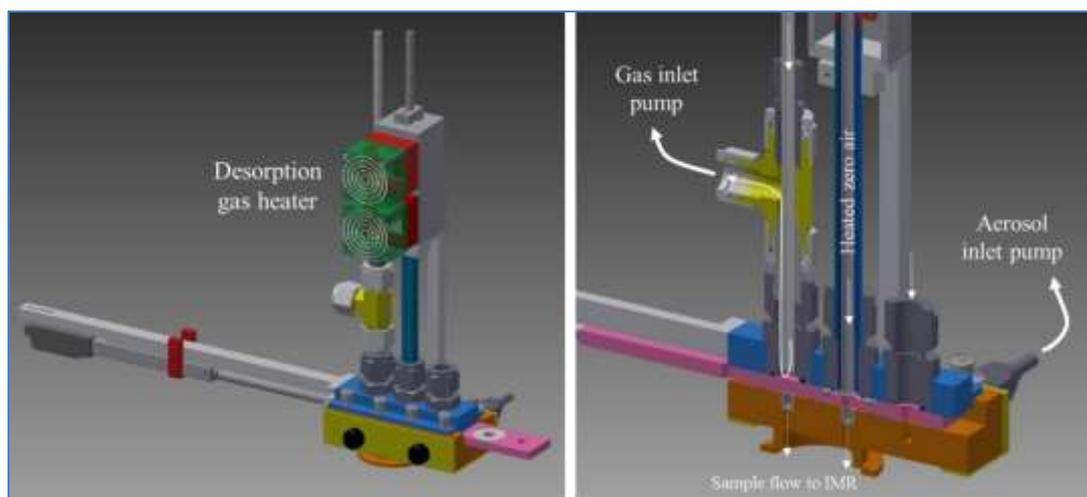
Drawing of the ARI FIGAERO assembly. Panel on left shows full assembly with mechanical actuator that controls gas sampling/aerosol collection or aerosol desorption operating modes. Panel on right is a cross-sectional view that show flows for both gas and particle sampling mode and the two apertures that connect with the IMR. In this view the FIGAERO slide is positioned in the aerosol desorption mode and the gas sample flow into the IMR is closed.
